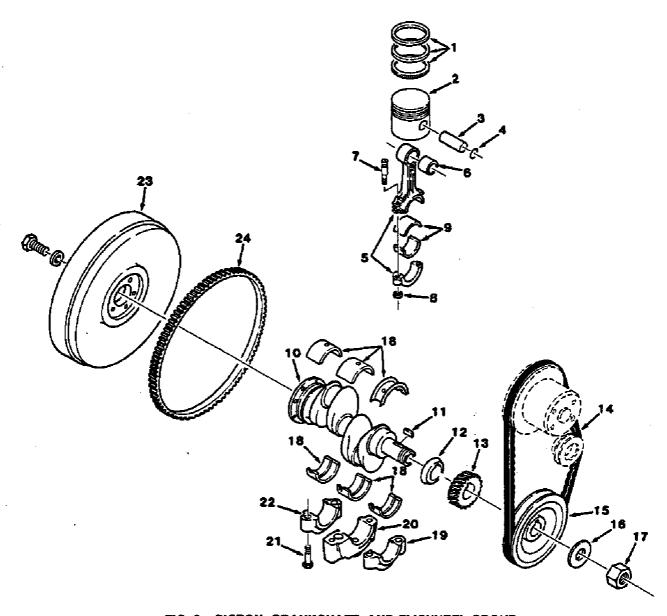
PISTON, CRANKSHAFT, AND FLYWHEEL GROUP
